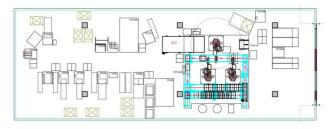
The layout of the FP assembly line for product B [Klepkova 2022]
